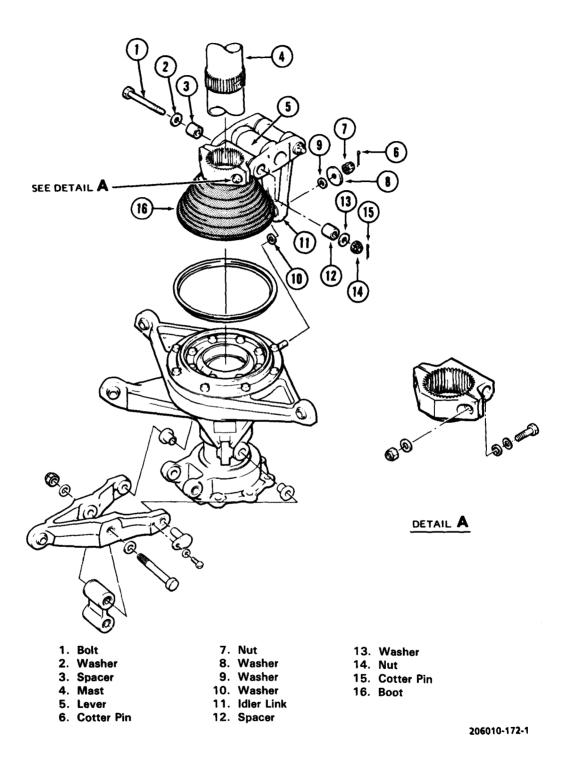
Collective Lever, Idler Link, and Collar Set Installation (Sheet 1 of 2)
